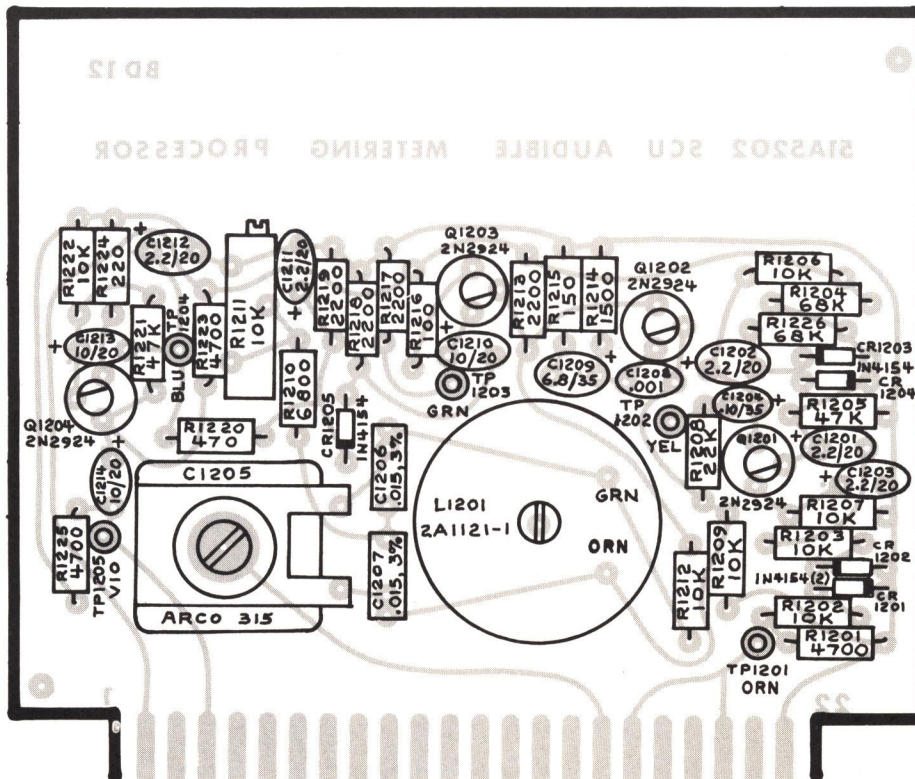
SCU Audible Metering Processor (Board 12), Parts Location
